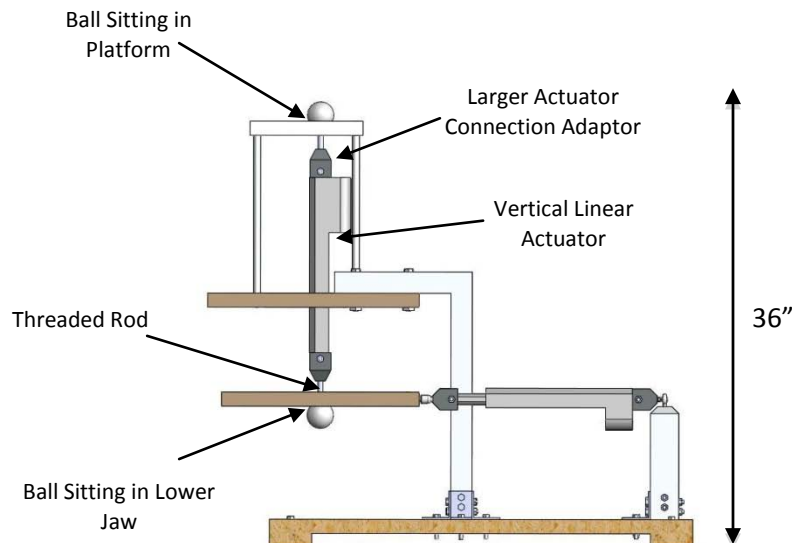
Prototype side view with vertical actuator caps removed for clarity. The upper ball will sit in a recessed section of the vertical actuator support platform while the lower ball will sit in a recessed hole in the underside of the lower jaw.
